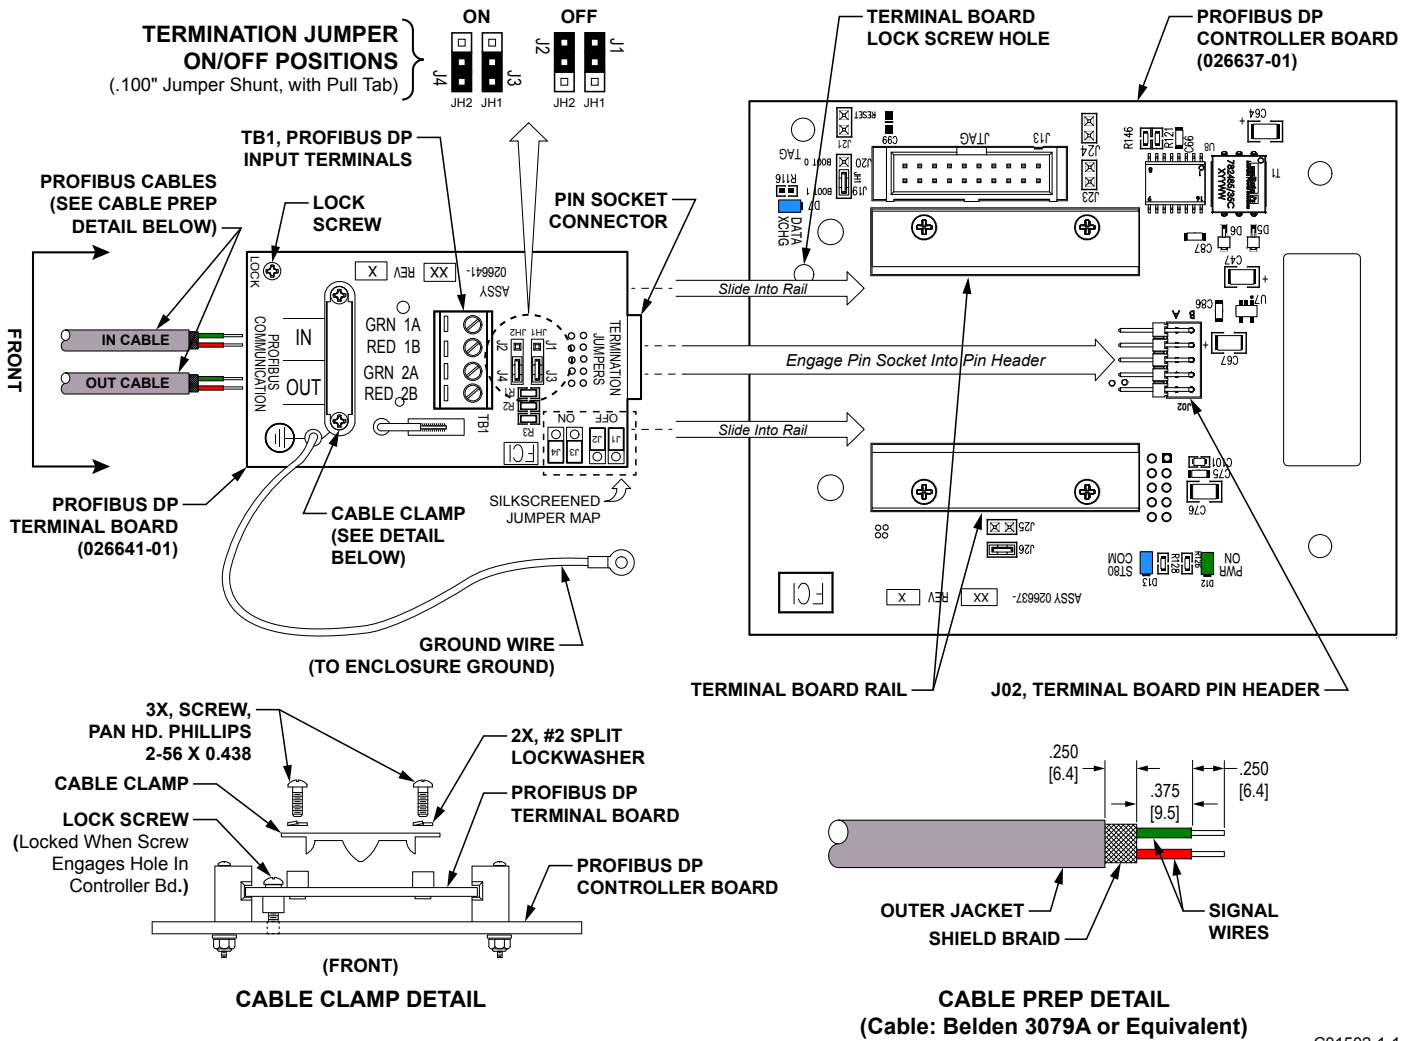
ST80/ST80L PROFIBUS DP Wiring and Jumper Configuration
